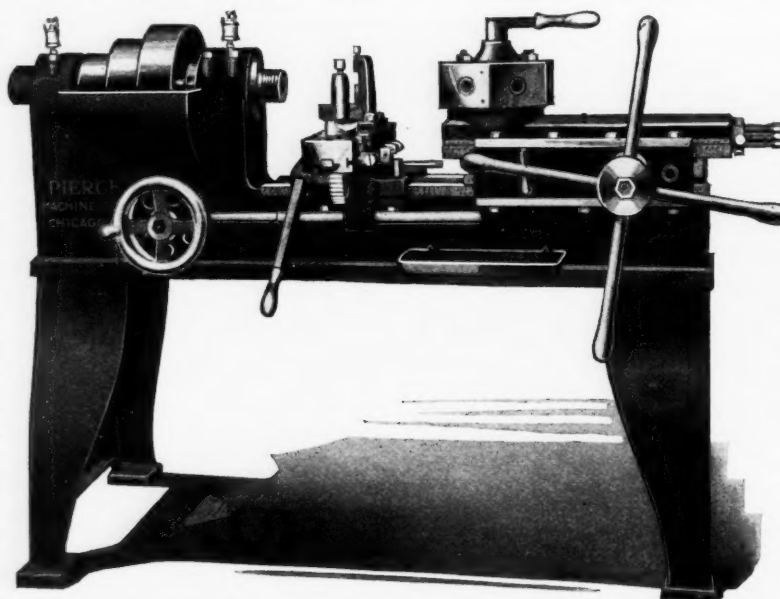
Machine shown in Fig. 1, without Collet, Bar-feed and Stock Support, making 14-inch Turret Lathe
